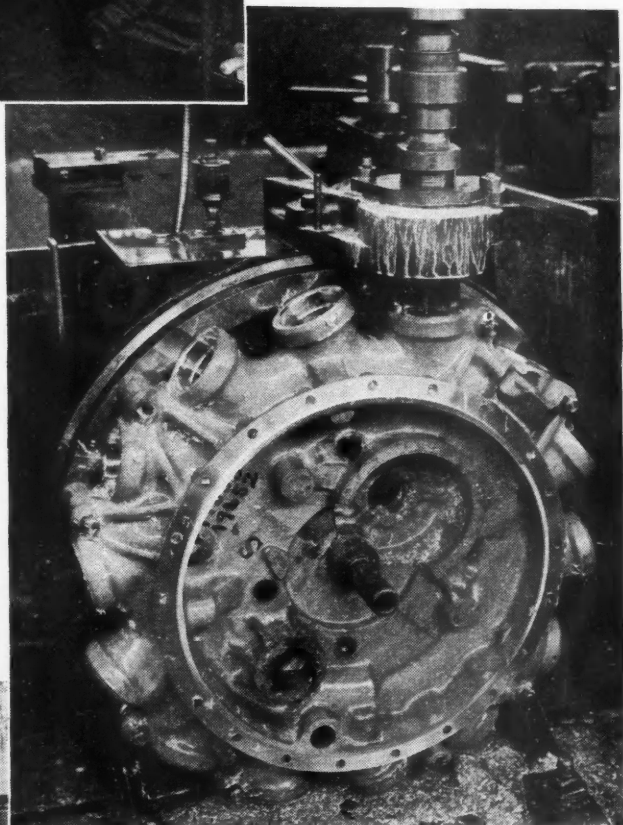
(Above) Fixture for boring and tapping operations on blower section port holes. In this fixture, mounted on a Morris radial drill, the casting is located by a central plug and a dowel which registers in one of the eight engine mounting bolt holes. The casting is held rigidly against the face of the fixture by screws in the remaining seven bolt holes. The operation illustrated is tapping and it will be noted that, for this operation, a lead screw is provided on the tool bar.
